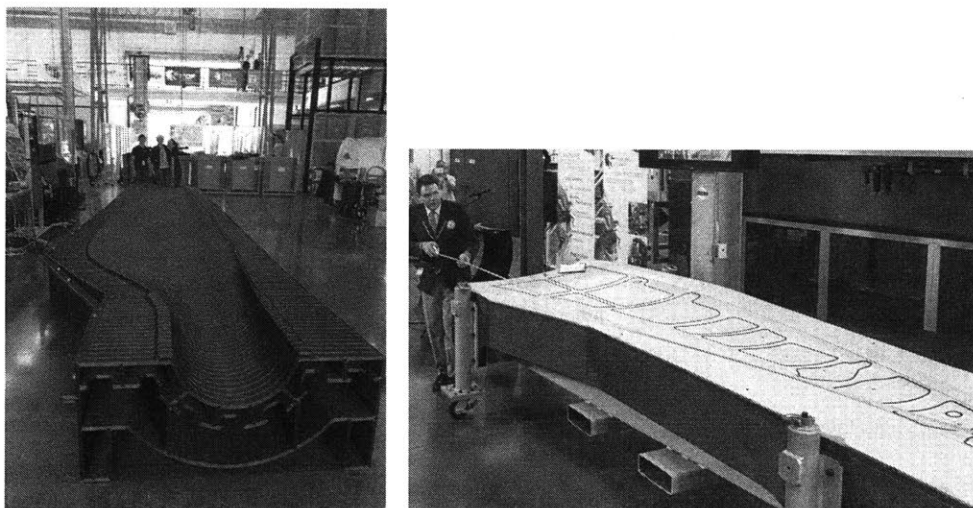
Wind Turbine Blade Mold [14] (left) and 777X Trim and Drill Fixture (right) [15].
